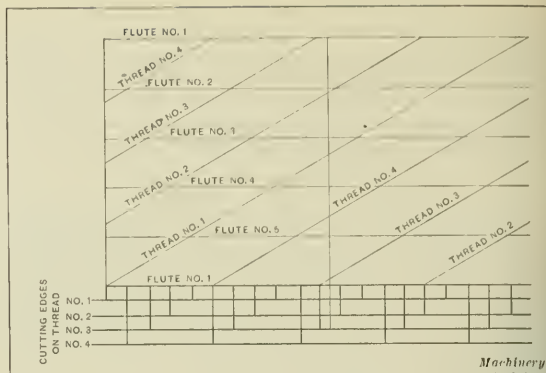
Development of Cutting Edges of Five-fluted, Four-threaded Hob
